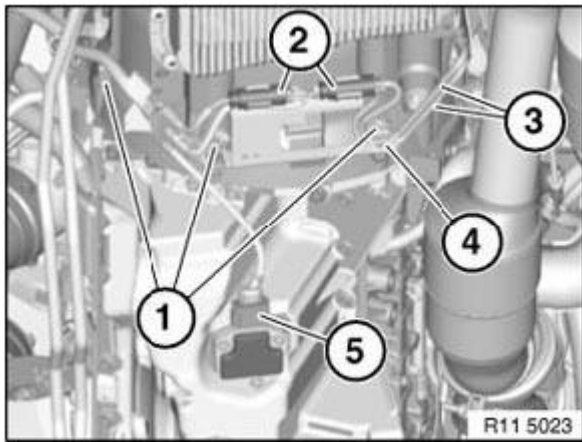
Identifying Electric Leads, Holder And Plug Connections
